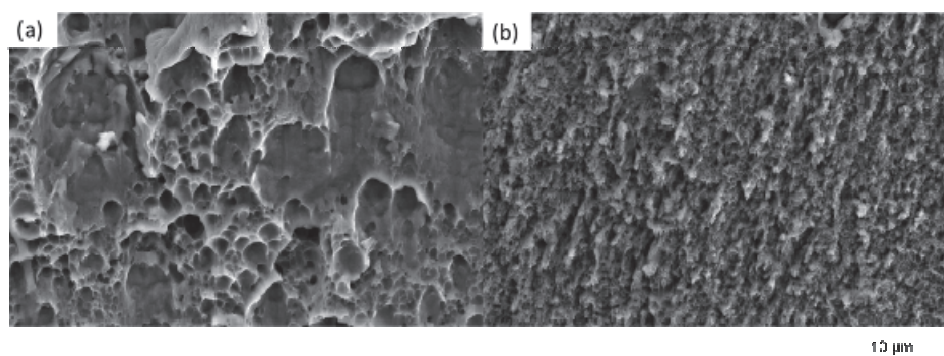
SEM fractographs of tensile fracture surface of weld-480: (a) upper part of weld, (b) lower part of weld along JLR.
